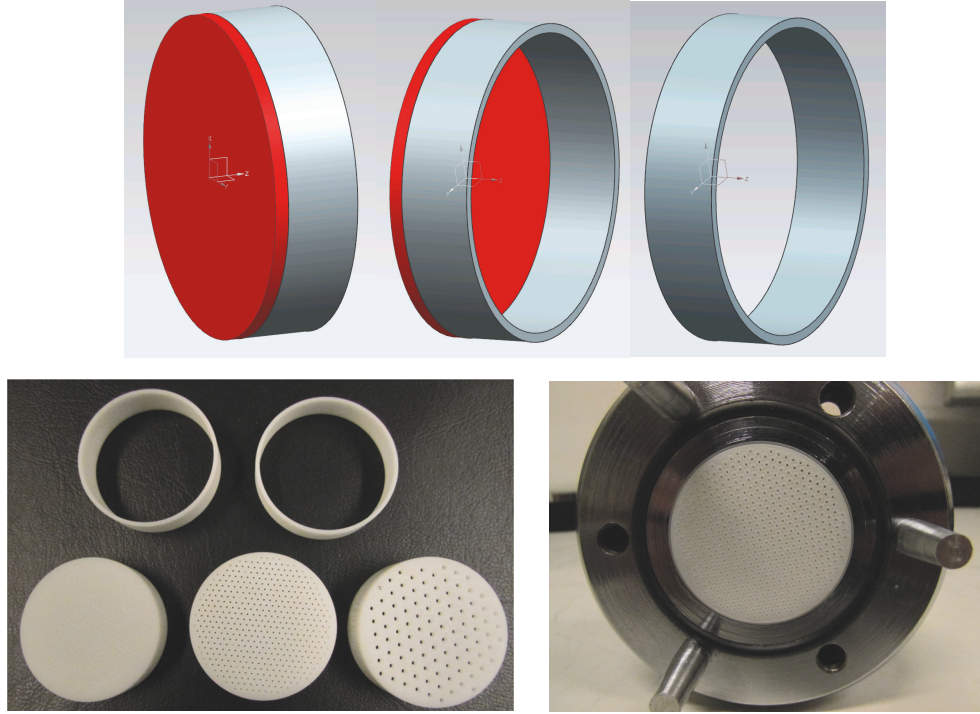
MPP samples for impedance measurements. Top: CAD figures. Bottom left: printed samples; bottom right: a sample installed in the impedance tube.
